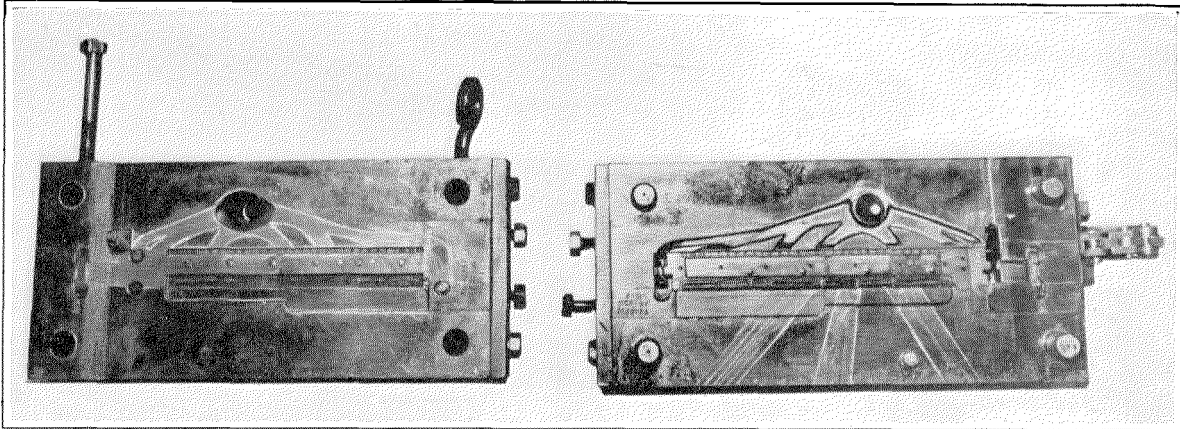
Mould for Producing the Sequence Switch Frame shown in Fig. 9.
